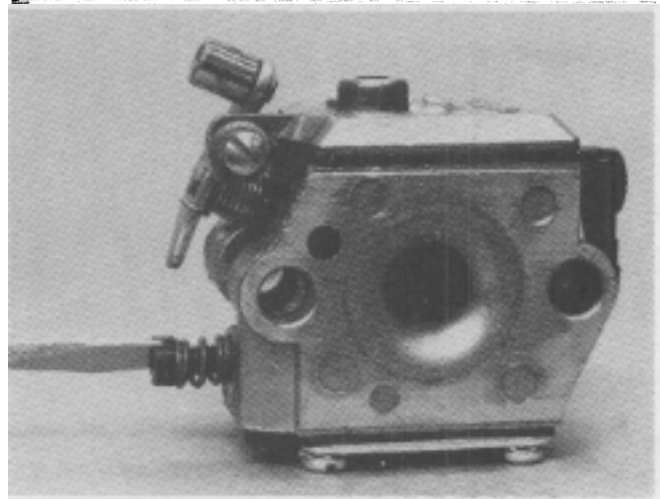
Assemble needle valve in carburetor. Seat it very lightly and back it out one and a half (1 1/2) turns.
